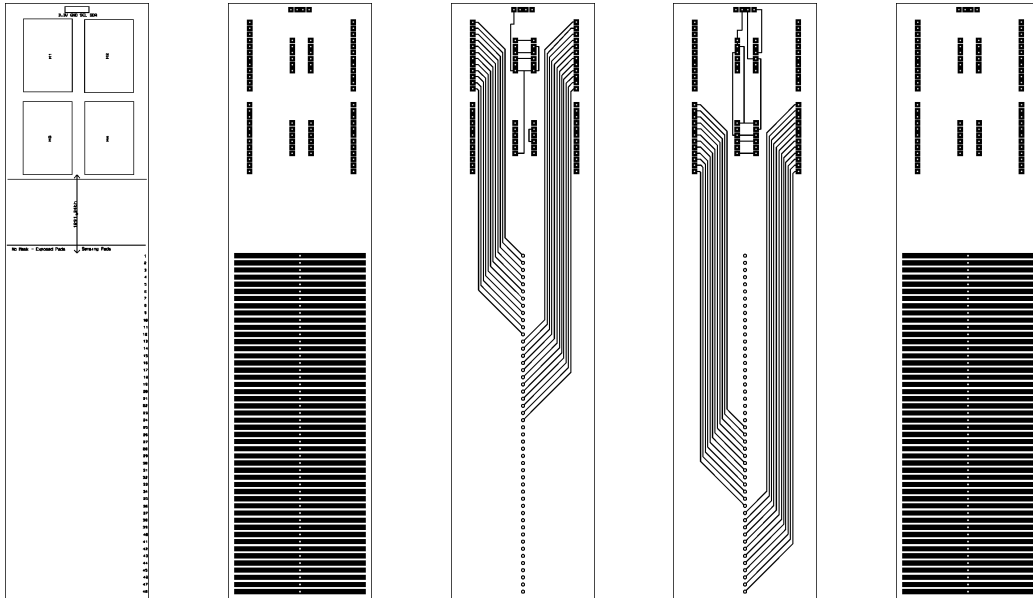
PCB Layout (from left to right): silkscreen layer, top copper layer, inner copper layer 1, inner copper layer 2, bottom copper layer
